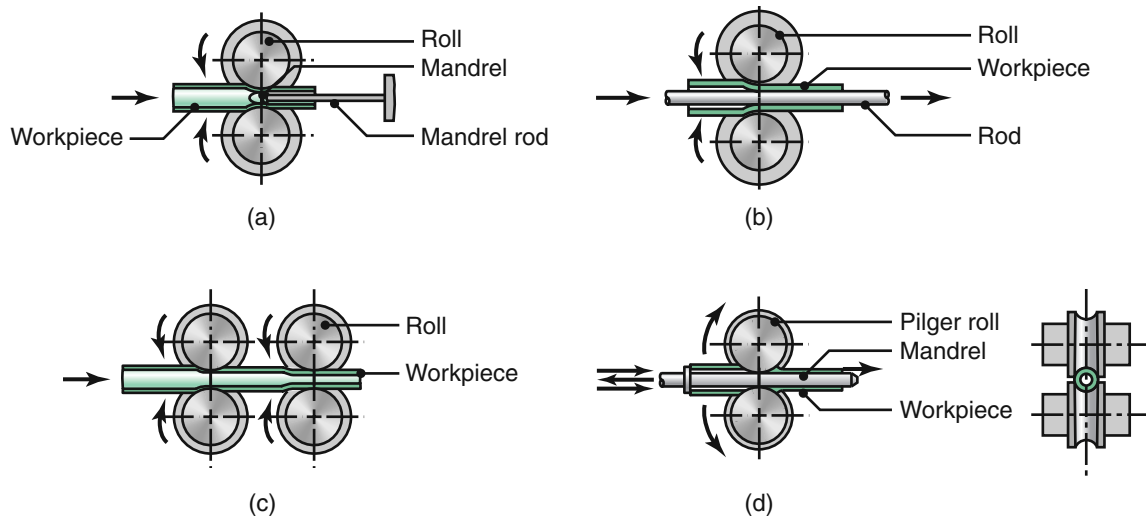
Schematic illustration of various tube-rolling processes: (a) with a fixed mandrel; (b) with a floating mandrel; (c) without a mandrel; and (d) pilger rolling over a mandrel and a pair of shaped rolls. Tube diameters and thicknesses also can be changed by other processes, such as drawing, extrusion, and spinning.
